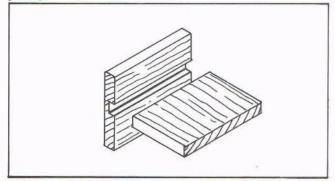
The DADO JOINT is used inside a carcase, often joining shelves into the sides of the case. It is also commonly used to join a drawer bottom to the sides and front of the drawer. In a "fully housed" dado (as shown) unless the wood is perfectly flat and the joint carefully cut there will be visible gaps along the joint line. As with the rabbet only one board is altered but it increases the number of joining surfaces to six.
